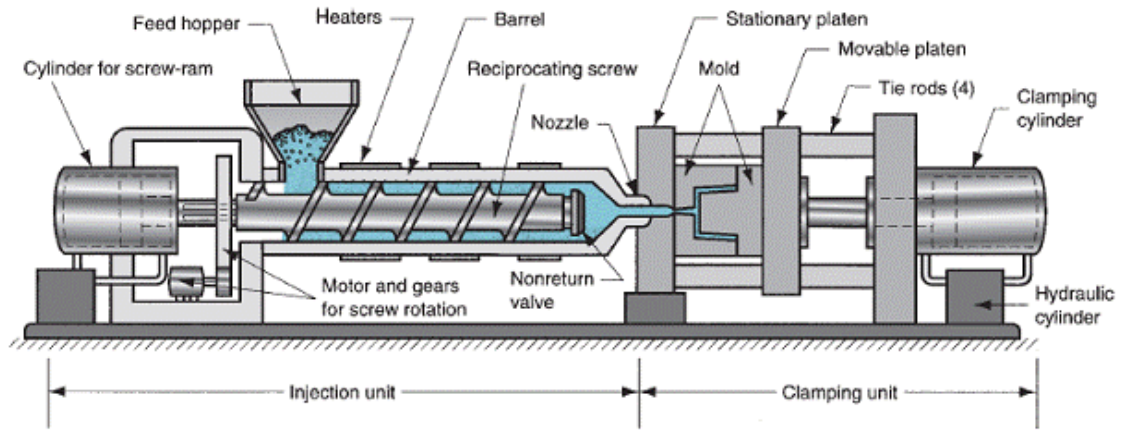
Schematic of an injection molding machine.¹⁰⁸
